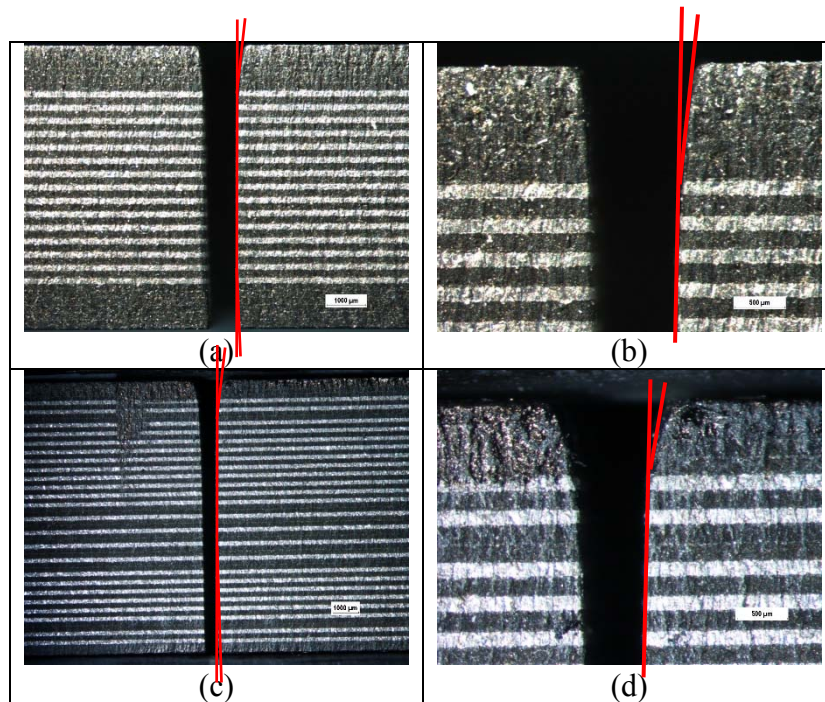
Kerf taper of straight cut AWJ-5 (a) Through-the-thickness section, (b) Top cross-section, and AWJ-32 (c) Through-the-thickness section, (d) Top cross-section
